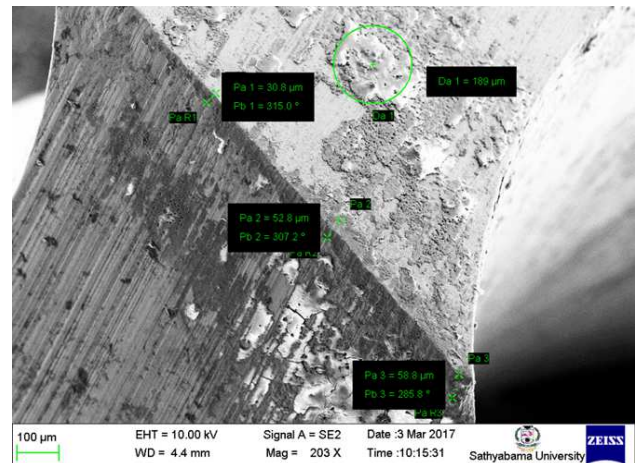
6-mm Cobalt Drill Bit after Drilling.
